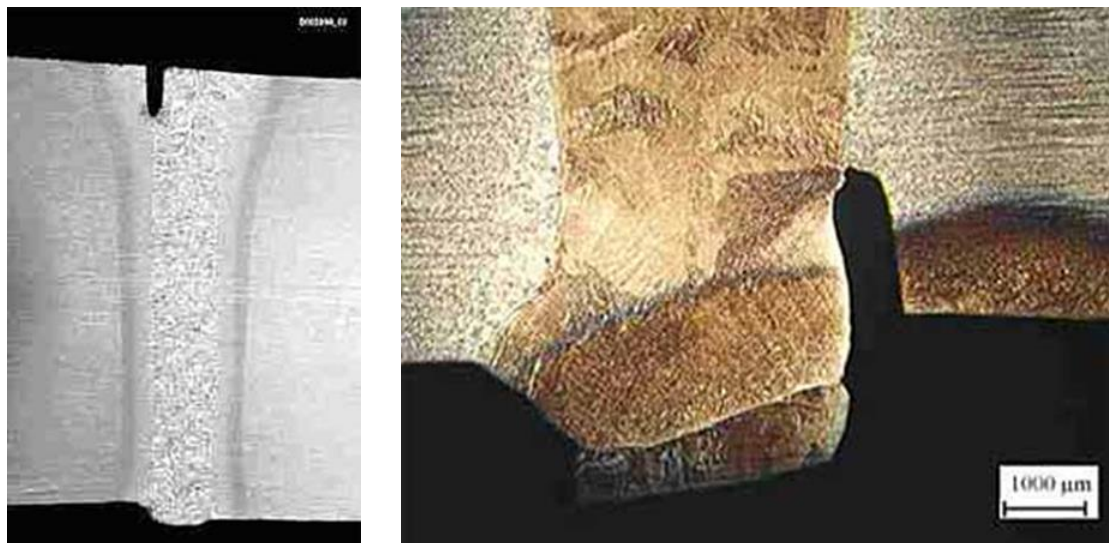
Notches in girth welds made by electron beam welding [14].
